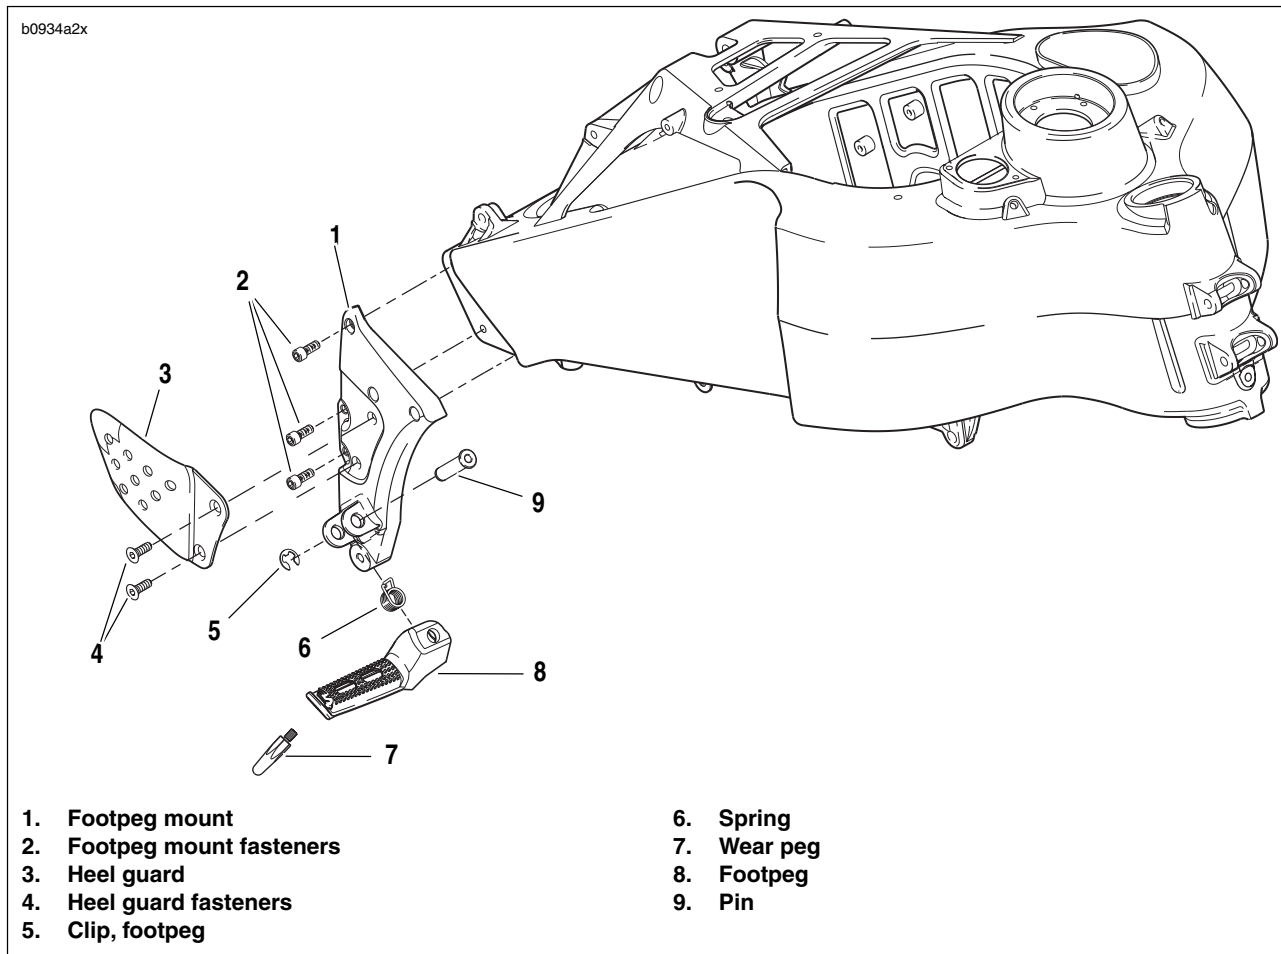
Rider Footpeg, Mount and Heel Guard Assembly
